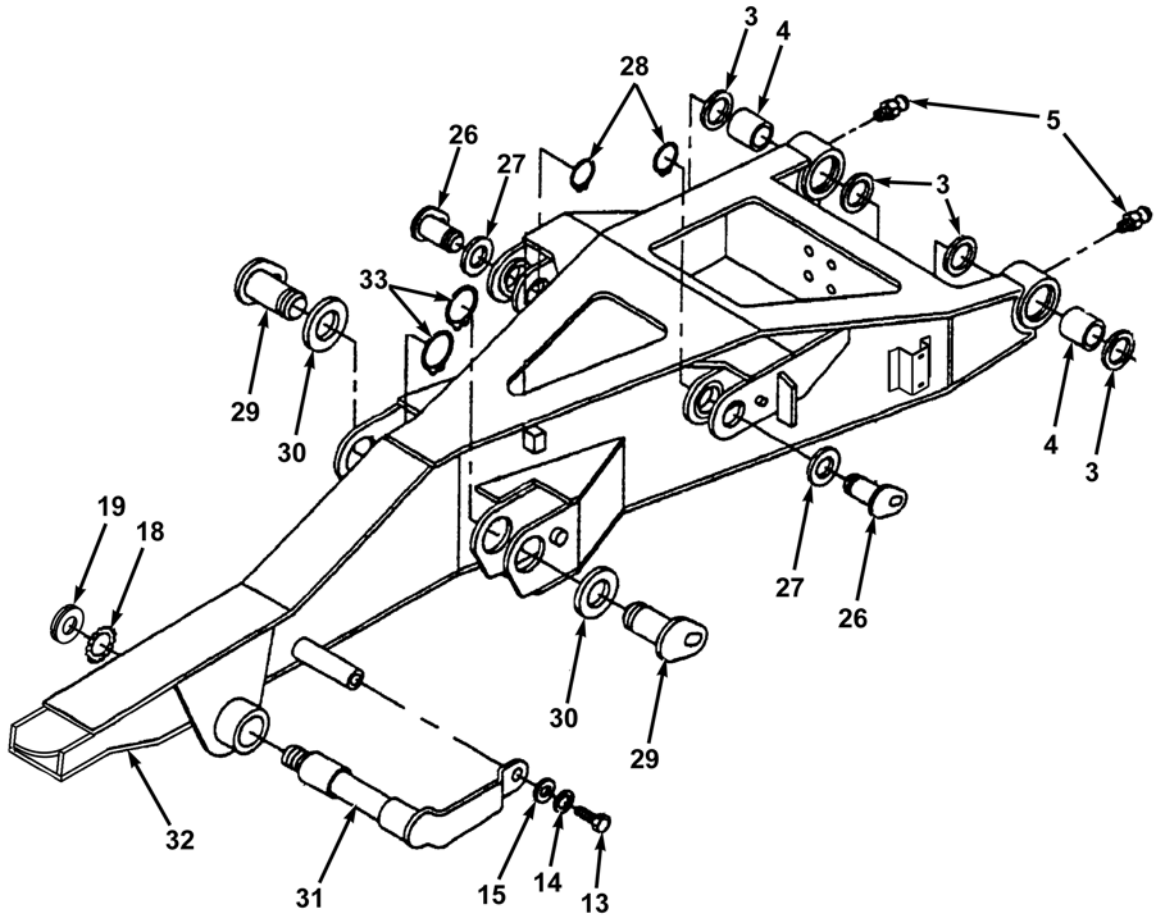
LOAD HANDLING SYSTEM ASSEMBLY (SHEET 2 OF 3)
